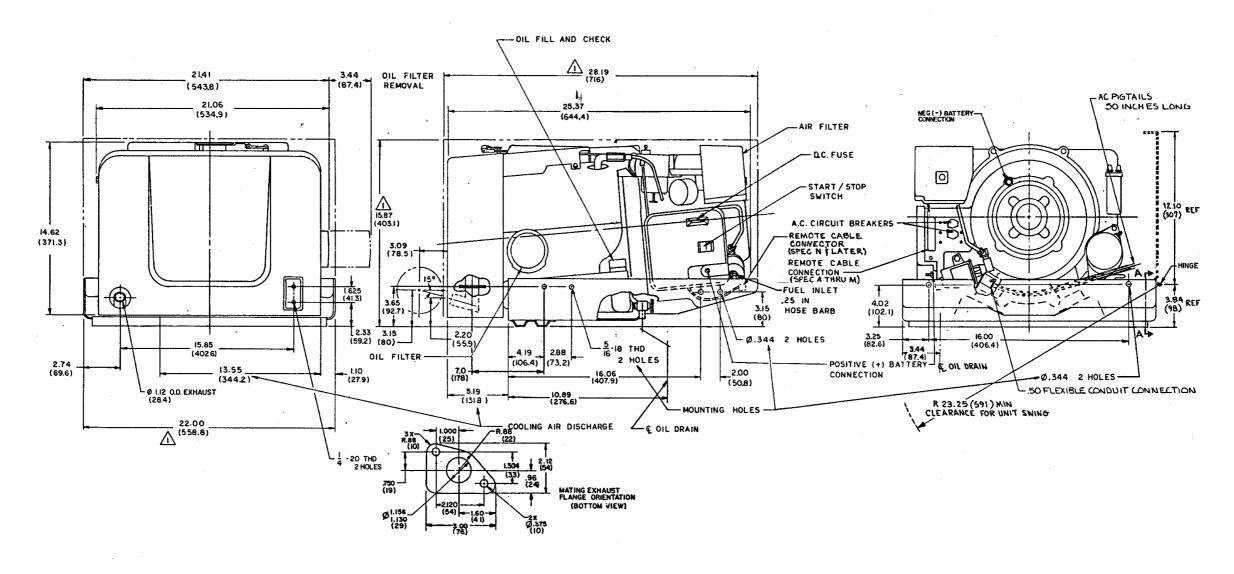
NHE (GASOLINE) - BELOW FLOOR
